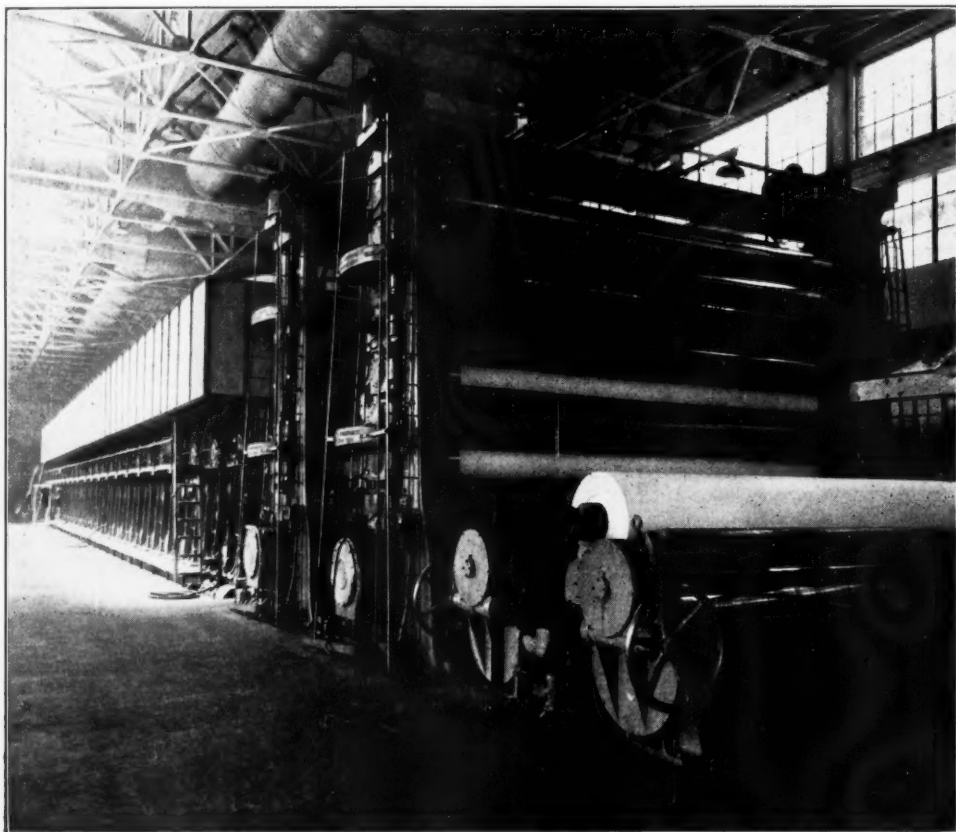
Showing one of the most modern types of paper mill calender installations. Piping elements for the lubricating system can be seen adjacent to the calender frame.
